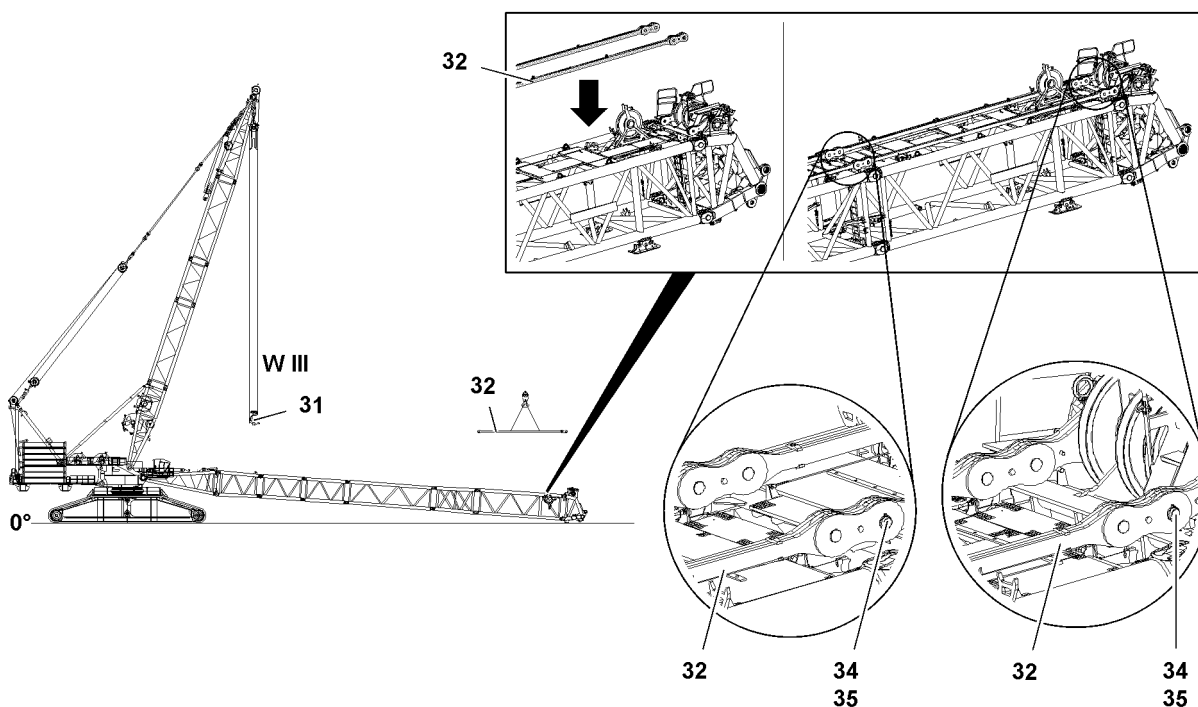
Disassembling the guy rods - Unpinning the guy rods
